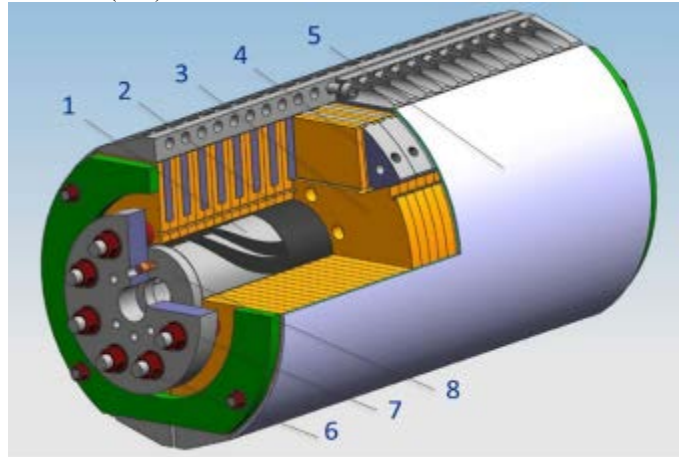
The 15 T dipole mechanical structure: 1 – Nb₃Sn coil; 2 – coil-yoke stainless steel spacer; 3 – iron lamination; 4 – aluminum clamp; 5 – stainless steel skin; 6 – axial tie rod; 7 – stainless steel end plate; 8 – pusher ring. – new
